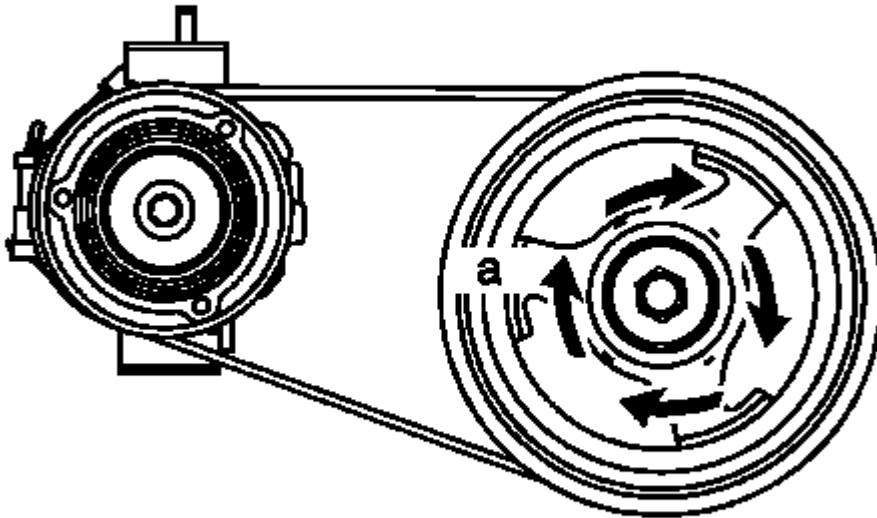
View Of Belt Installation Tool & Balancer
